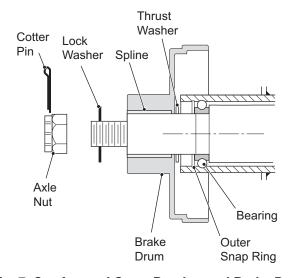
Cut Away of Outer Bearing and Brake Drum
